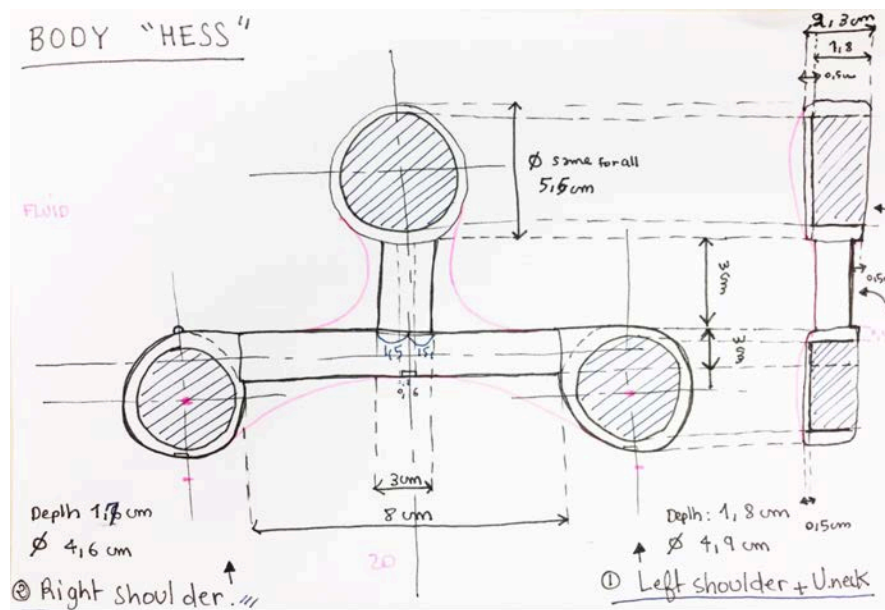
Final sketch of the "HESS" prototype (the body)
